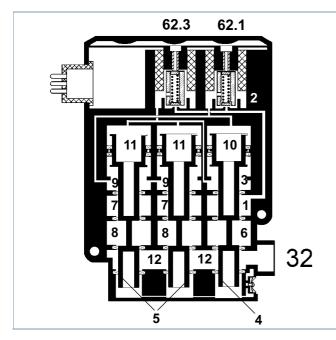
Cross-section view of an ECAS solenoid valve with pulse-controlled slide valves for the lifting axle portion in the "hold pressure" position
